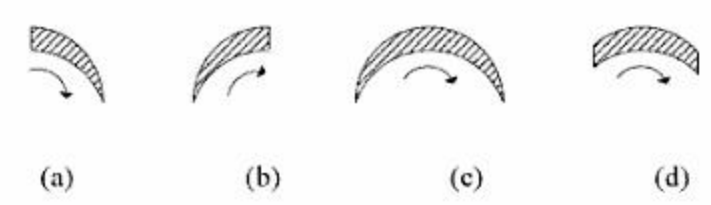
Chip thickness in different milling types: a. Climb milling (down milling); b. Conventional milling (up milling); c. Slotting (channel cutting); d. Centre cutting
